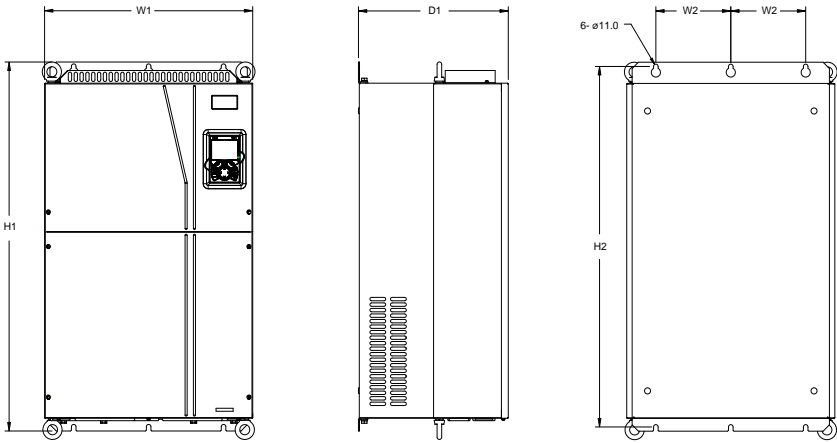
Wall-mounting diagram for 660V 160–220kW models
